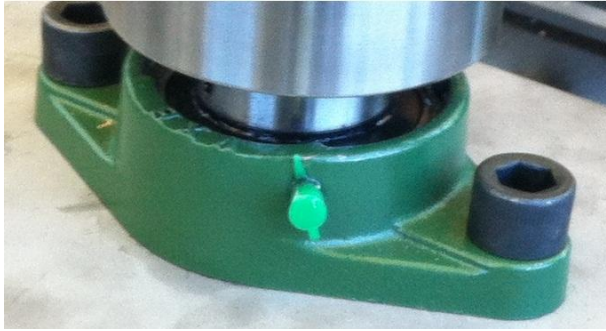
Image of One of the Bearings Mounted on a Pulley Plate
